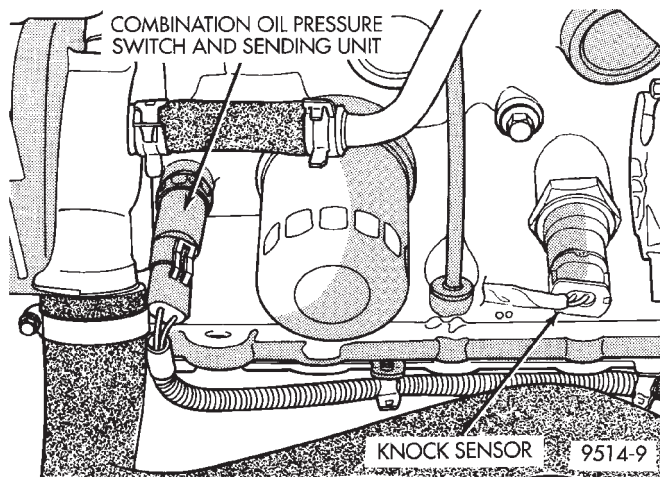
Knock Sensor and Oil Pressure Sending Unit Electrical Connection
